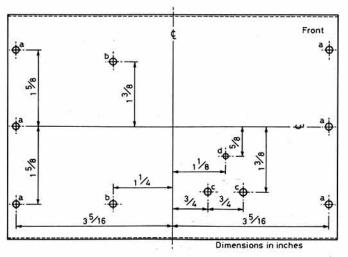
Left-hand side panel. (a) 4BA clearance hole for bolting to flanges on front and back panels. (b) 4BA clearance hole for mounting RFC2. (c) 4BA clearance hole for mounting C9. (d) 6BA clearance hole for fixing solder tag
